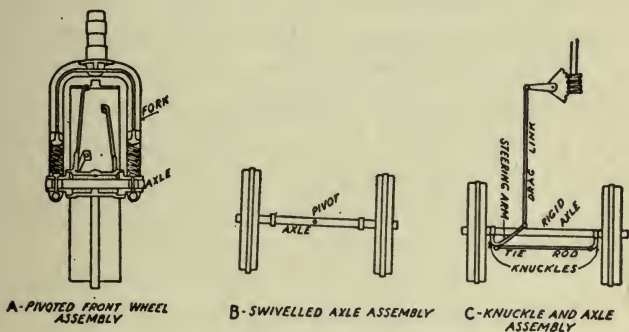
KINDS OF FRONT WHEEL ASSEMBLIES
